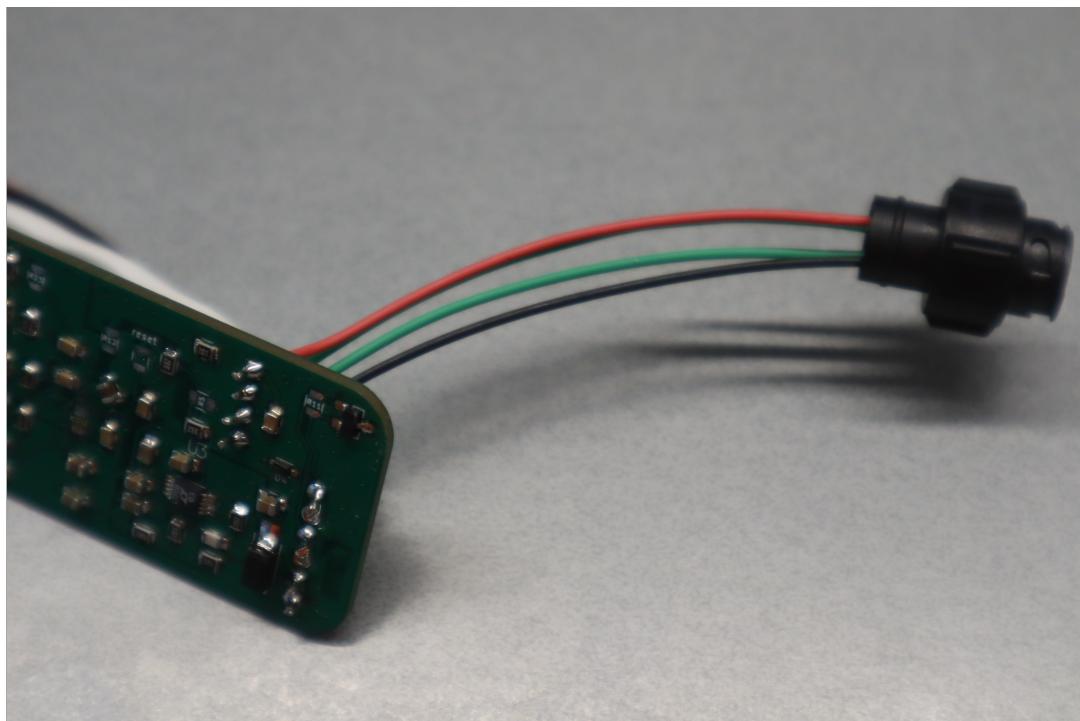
Wires soldered to a board for use of a wire to wire connector for SWD programming.
